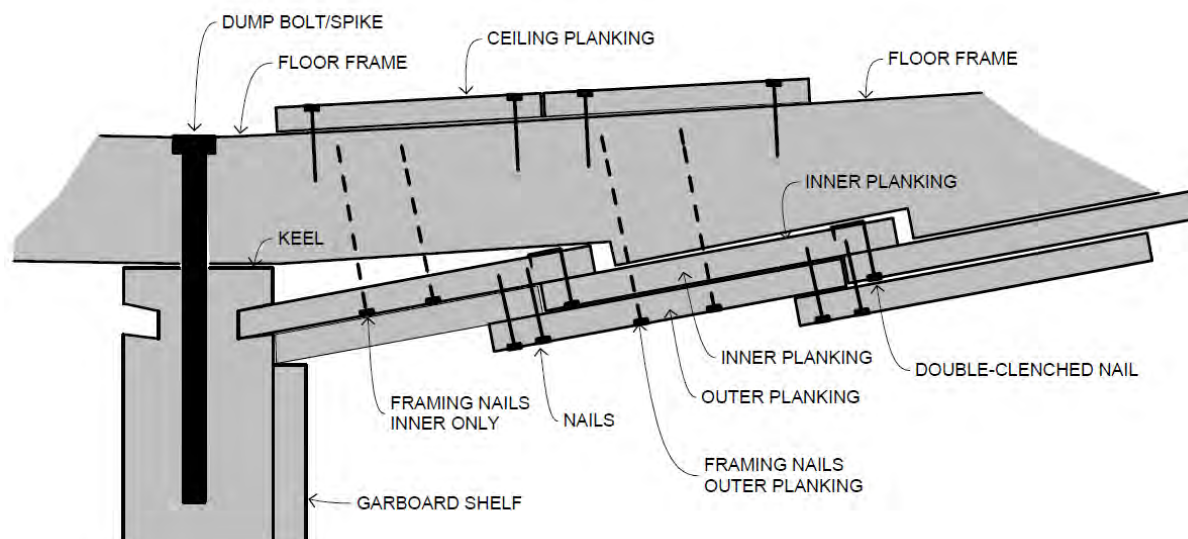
Hull cross-section diagram of possible fasteners placement of framing nails either from inner or outer layer planking. (Source: Benjamin Wharton 2021).
